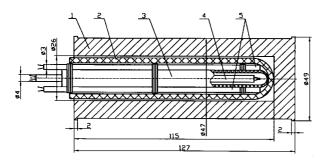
Thermocouples Assembly Inserted to Calibration Furnace, where:
